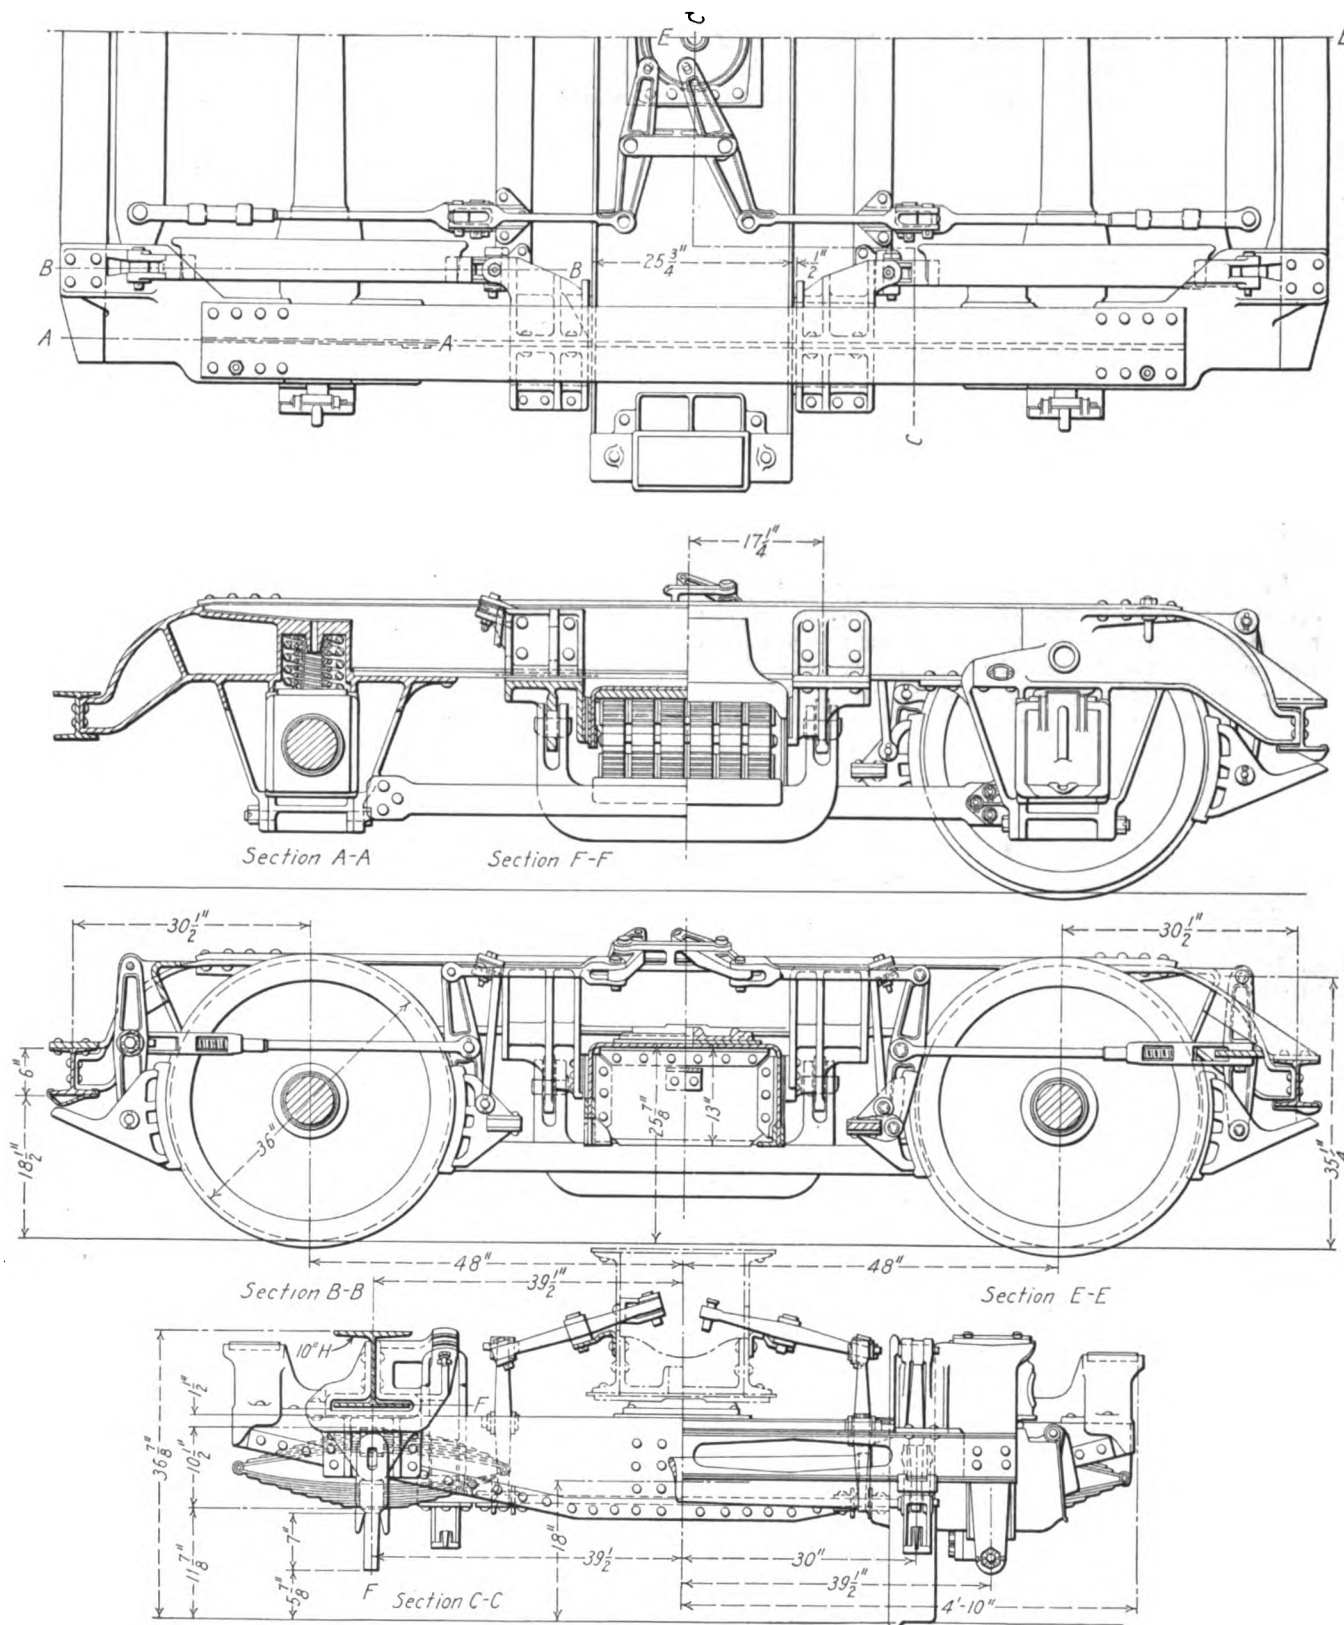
Present Standard Four-Wheel Steel Passenger Car Truck; Pennsylvania Railroad
